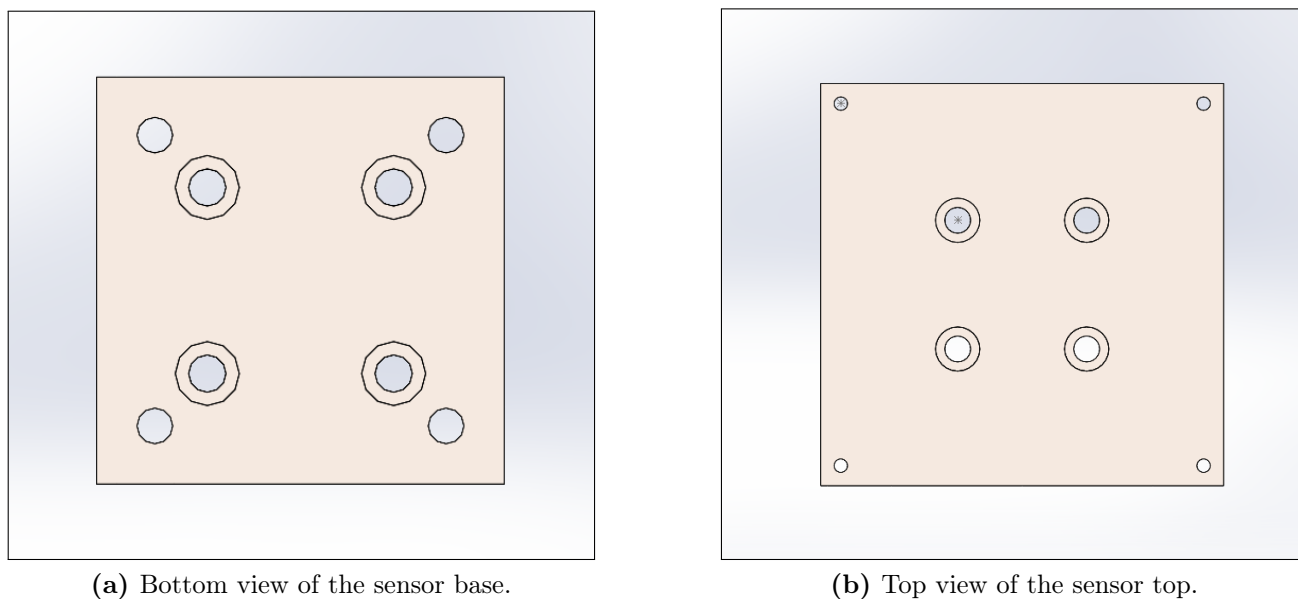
Mounting holes for the sensor base and the sensor top.
